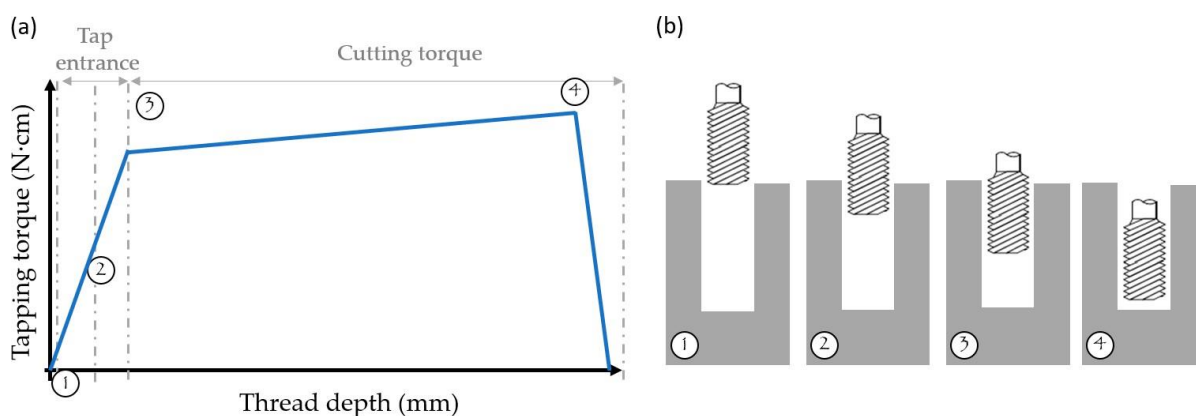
The tapping process: (a) graphical measurement of the tapping torque, (b) different positions of the tap during processing. (1) beginning of the cut, (2) tool penetrating the workpiece, (3) complete chamber teeth and (4) beginning of the reversal of the spindle.
